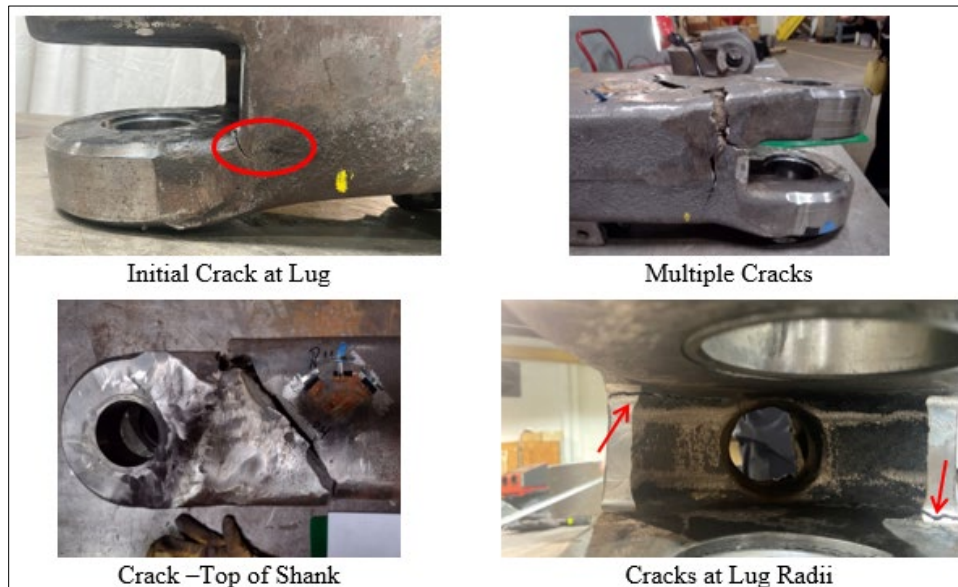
Crack Locations – Coupler Failure Test Specimen 1
